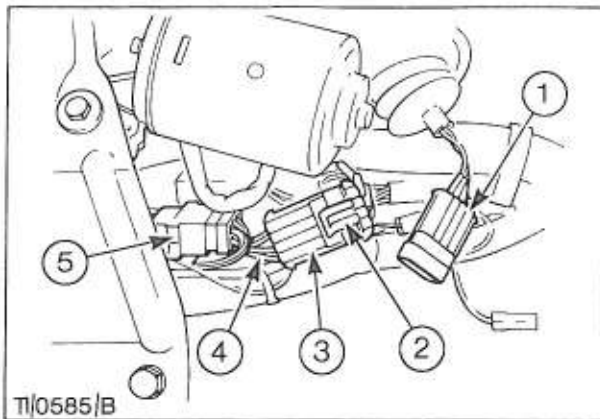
Connecting Gearbox Sensor To Vehicle Harness
